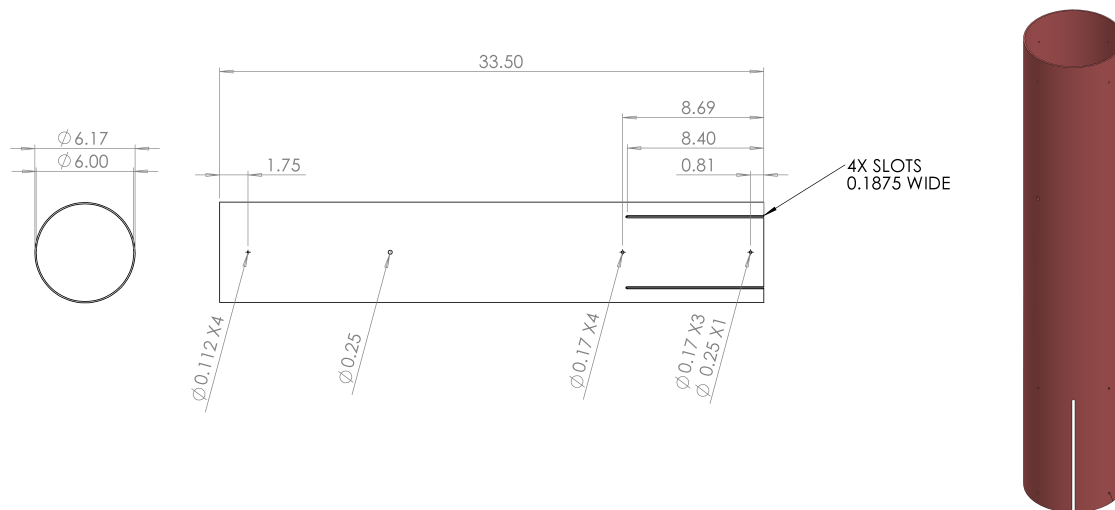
Drogue Parachute Bay/Fin Can airframe dimensional drawing (in.)
